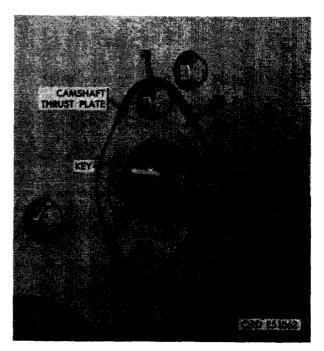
CHECKING CONDITION OF CAMSHAFT GEAR KEY AND THRUST PLATE WEAR.
